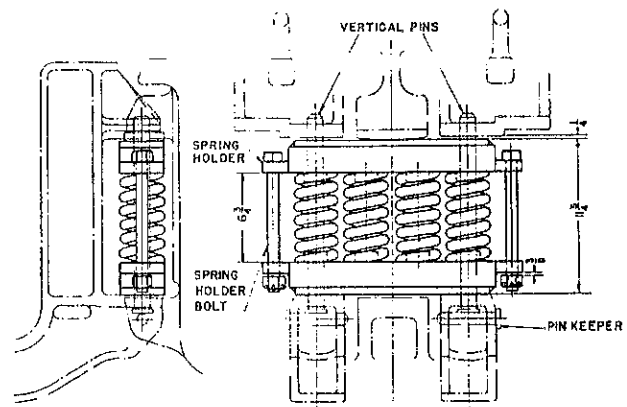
TRACTION MOTOR NOSE SUPPORT
